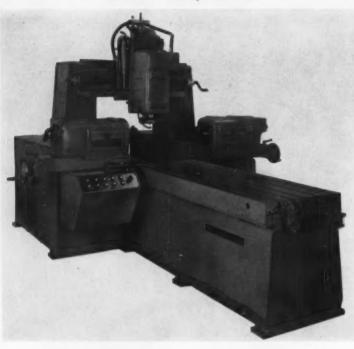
Onsrud Tri-way Mach-Mil designed to mill three sides of nonferrous work-piece simultaneously
